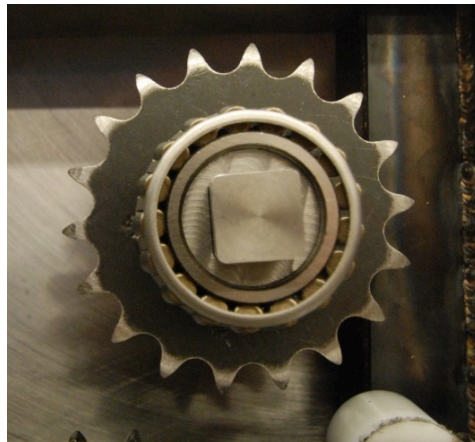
Tapered Roller Bearing and Square Cap Assembly on DC Motor Shaft Assembly
